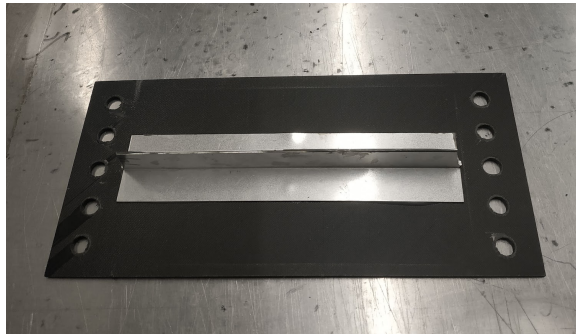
Manufactured panel with Aluminium stiffener and bolt holes
